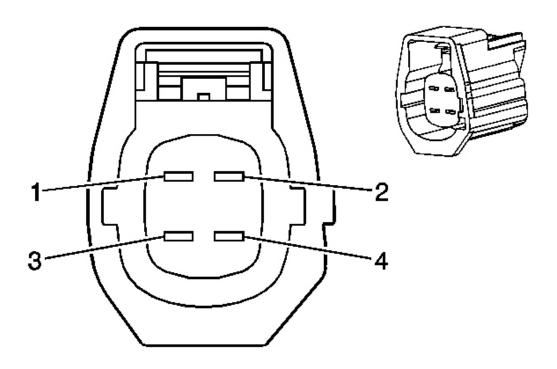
Electronic Brake Control Module (EBCM) C1 Connector End View Courtesy of GENERAL MOTORS CORP.
